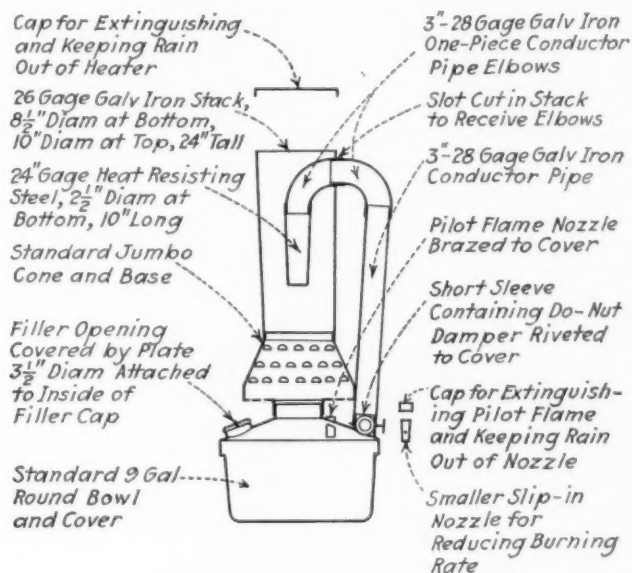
LEONARD COMBUSTION-CHAMBER BOWL-TYPE ORCHARD HEATER
